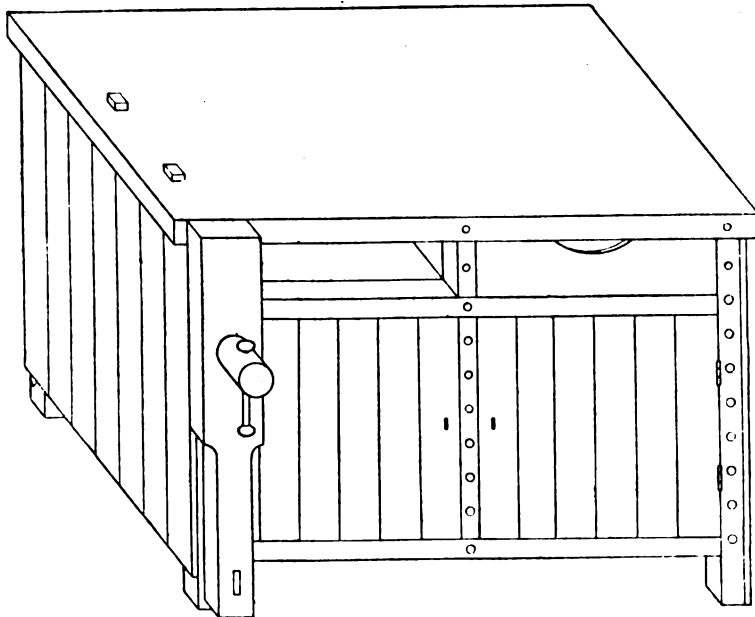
COMBINED BENCH AND TOOL CHEST.
